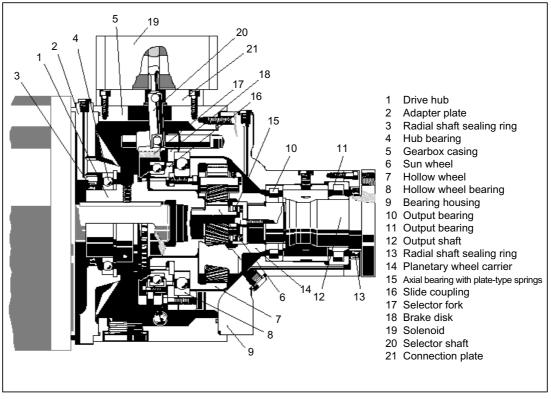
Gearbox design for 1PH7, SH 100 to 160
